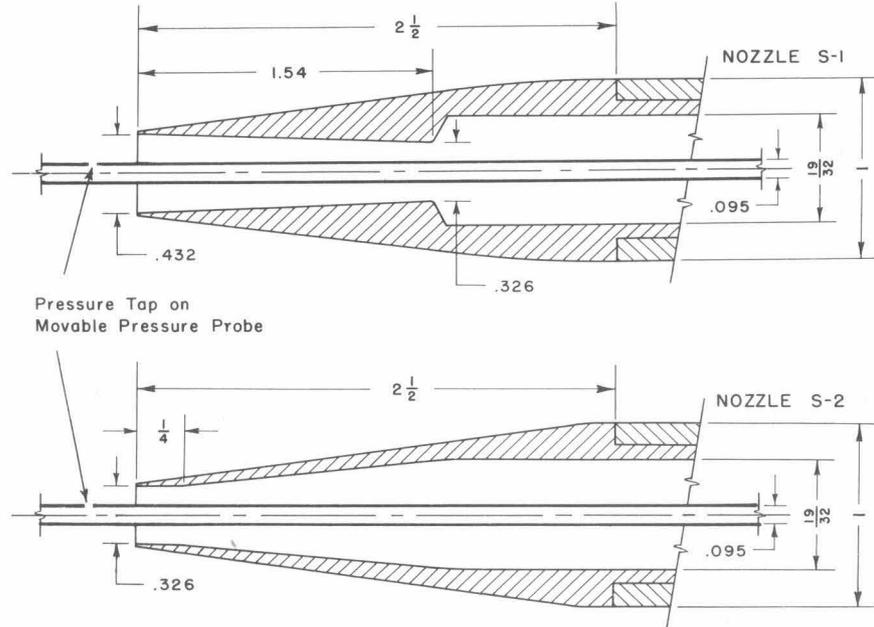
Scale drawings of steam nozzles S-1 and S-2 used in this investigation showing movable static pressure probe in place.
